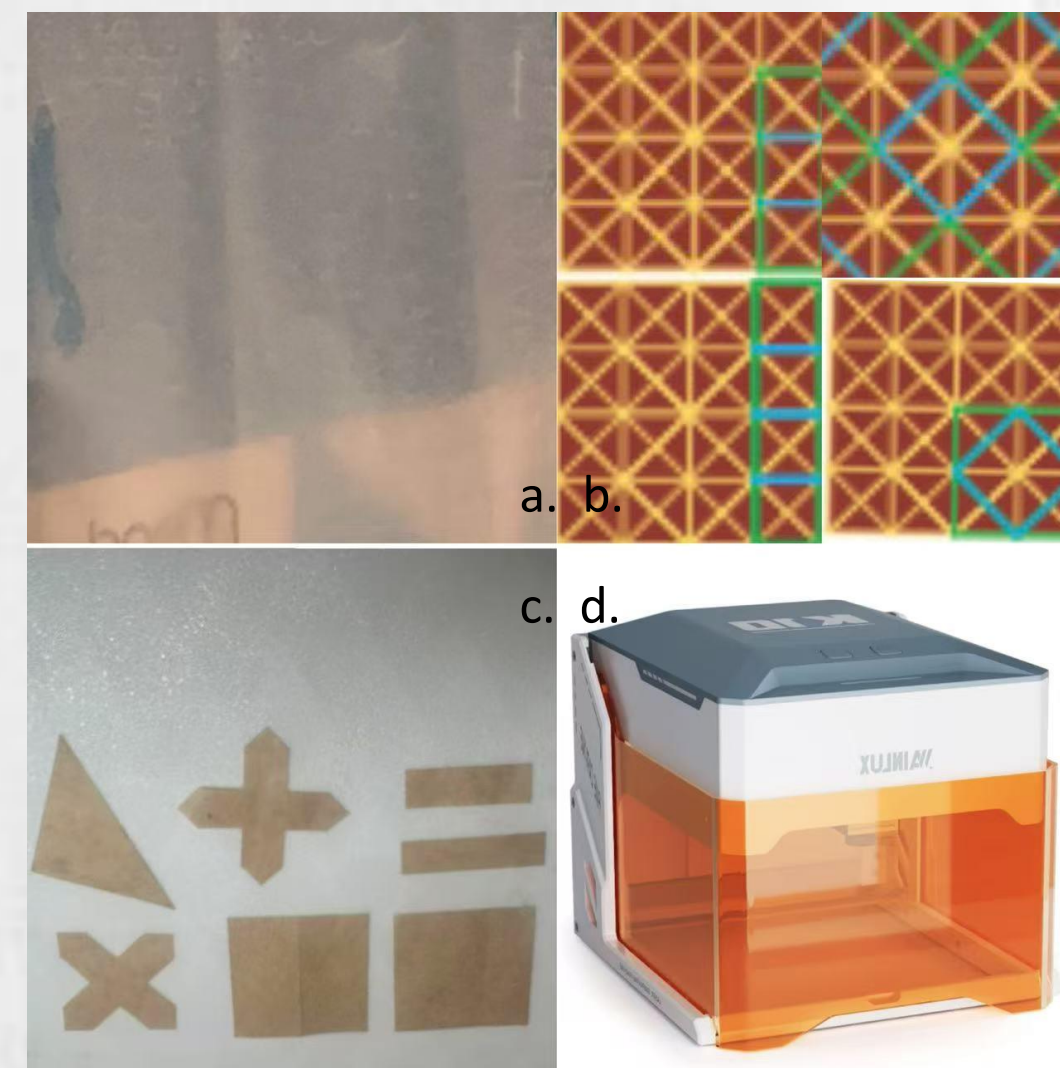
(a) Silicone on paper ,(b) previous design shape, (c) paper after cutting, (d) laser cutter
